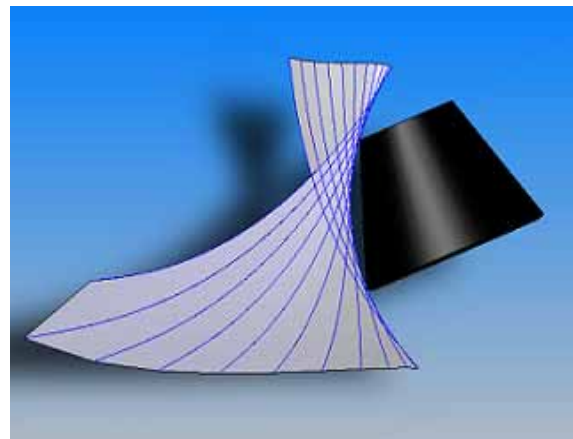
Pinion surface calculated and drawn by 3 dimensional cad software.
